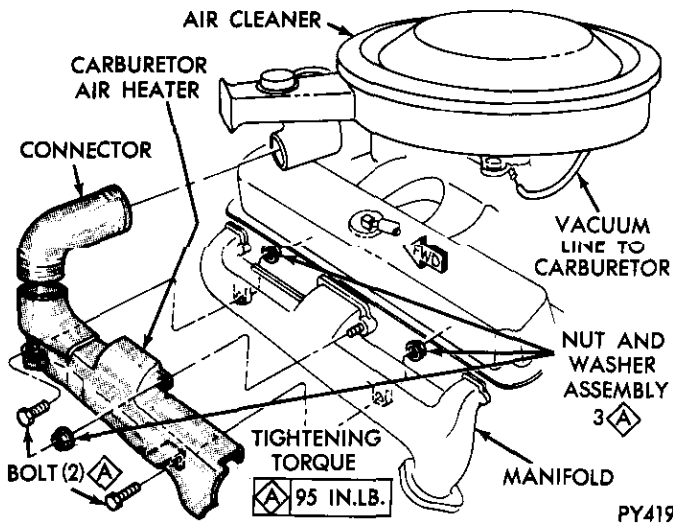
Carburetor Air Heater, 318 Cubic Inch Engines
